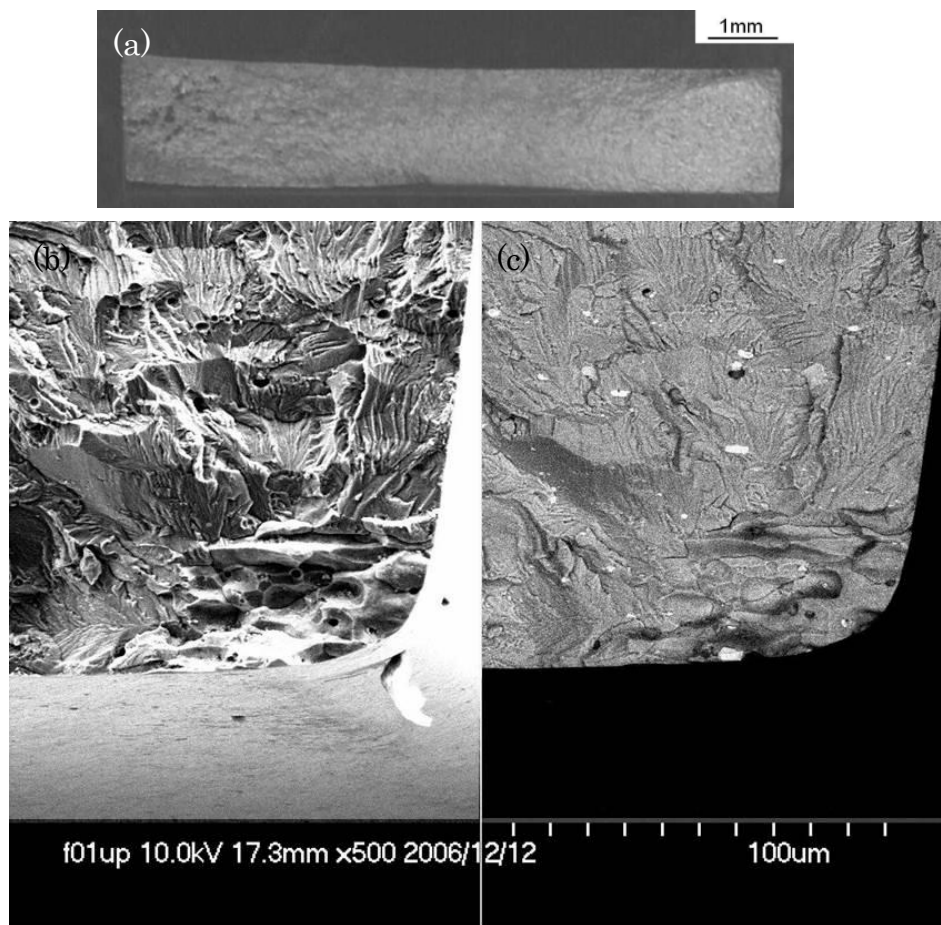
Typical fracture surface in case particle is crack origin (a) Fracture surface, (b) Fracture surface near origin (SEM), (c) Fracture surface near origin (Backscatter Image)
